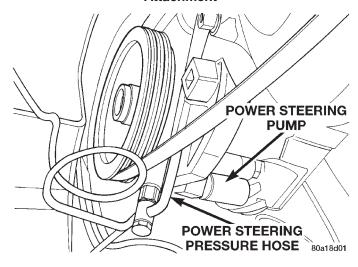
Power Steering Pressure Hose Attachment To Pump
